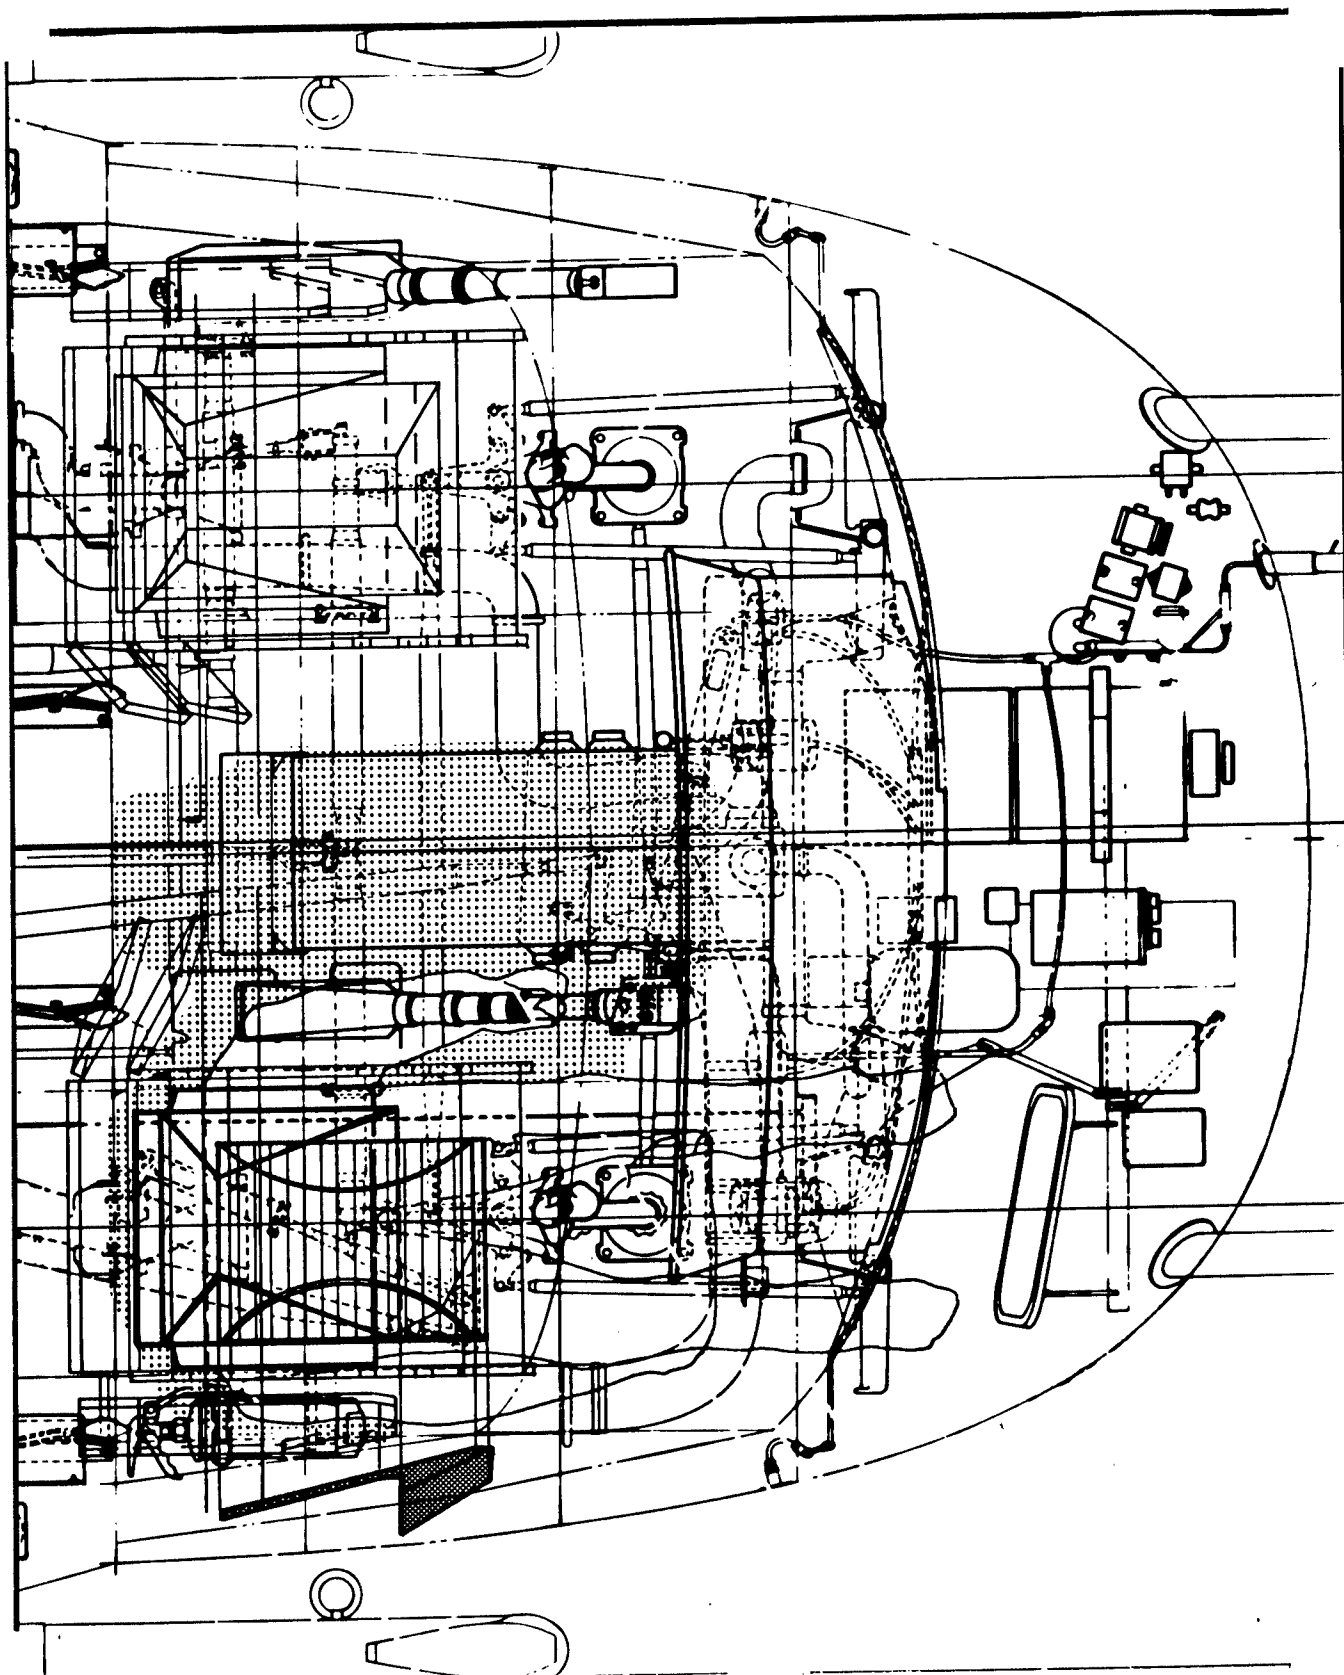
ARMOR CONFIGURATION 2 -- PLAN VIEW 90° AZIMUTH, -45° ELEVATION
